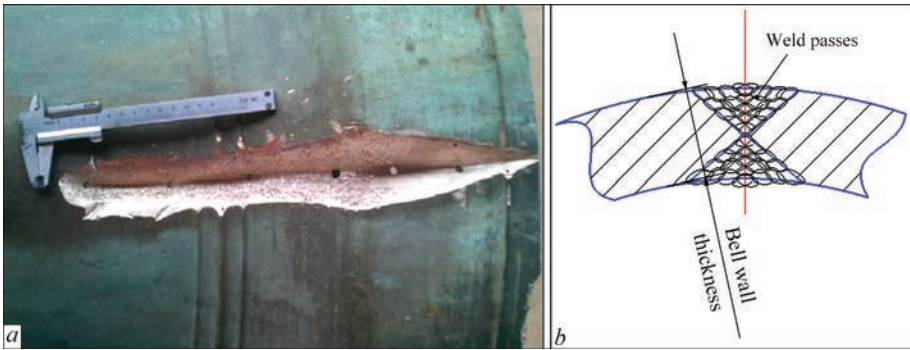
Appearance of a treated crack (a) and schematic of crack welding up (b)
